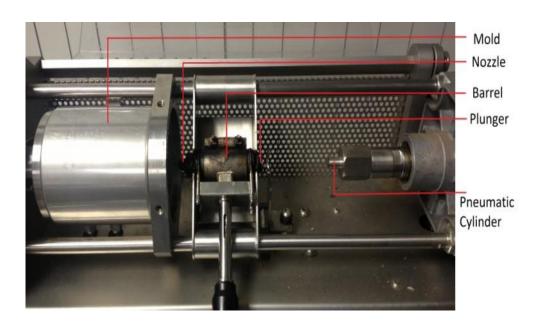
DSM Xplore Micro 10cc Injection Molding Machine
